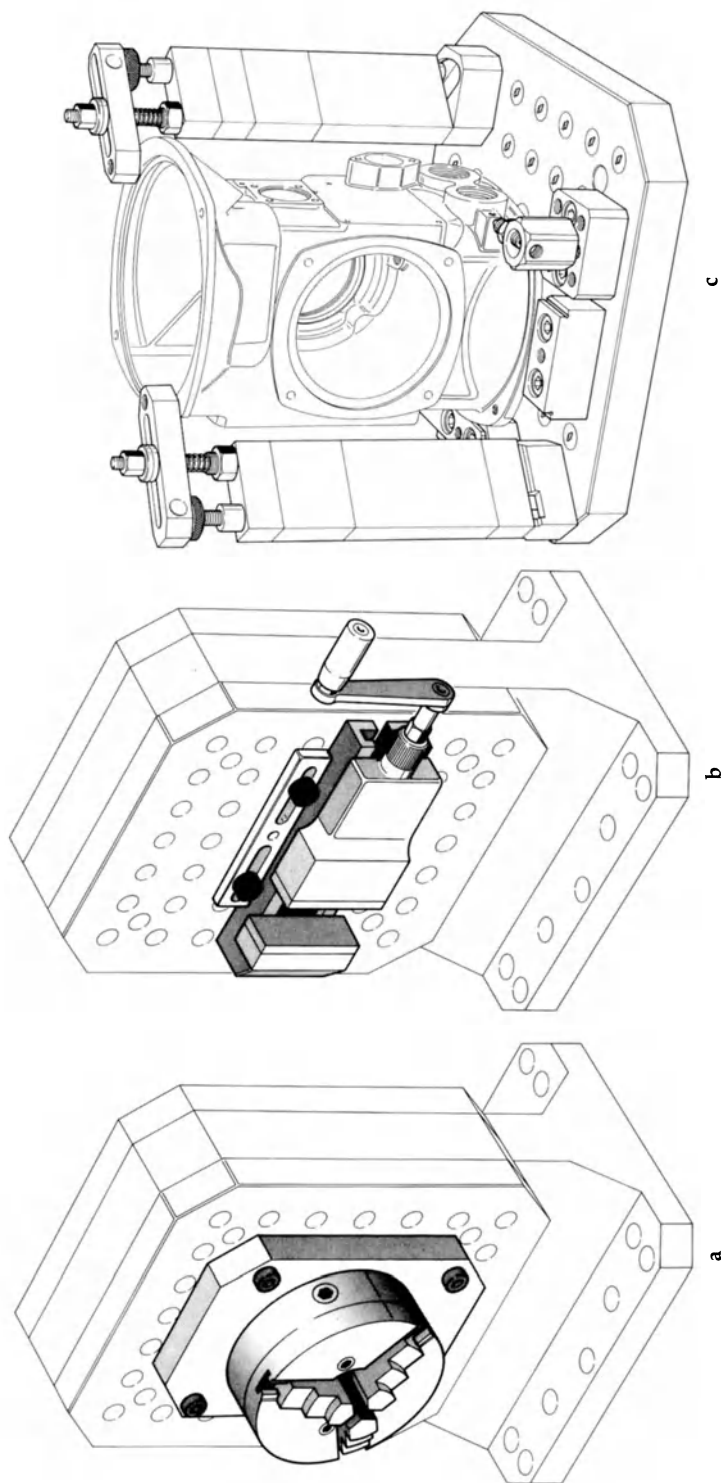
The adaptability of "modular fixturing" for machining centres. a A chuck fitted to a grid plate on a "tombstone". b A vice positioned on a grid plate on a "tombstone". c Workpiece setup using elements from the "modular fixing kit" for a machining centre. [Courtesy of Wix & Royd Ltd.]
